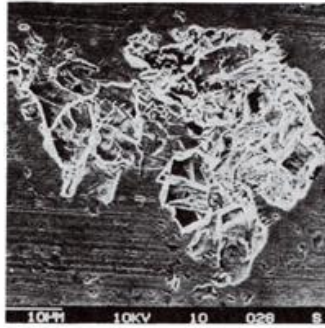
Ball bearing surface damaged by a destroyed mineral particle, SEM-foto
